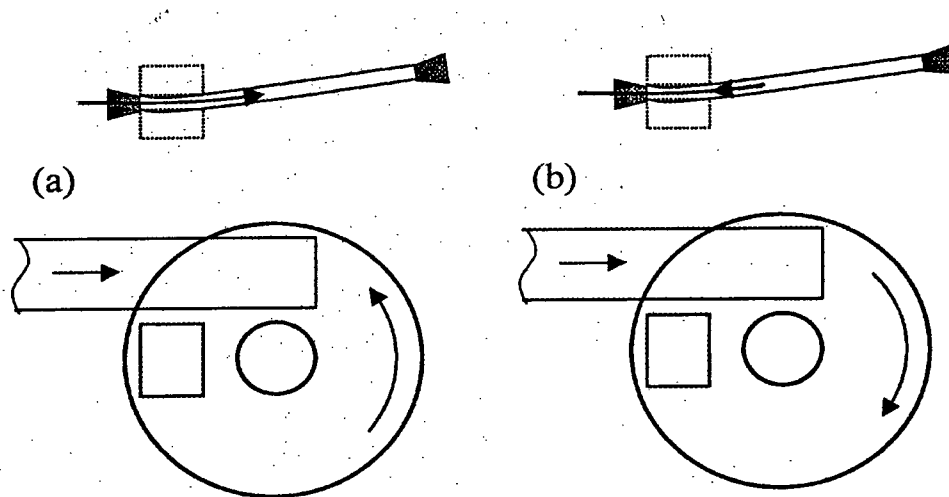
Cutting forces on a guided saw. (a) Counter Cutting, (b) Climb Cutting
